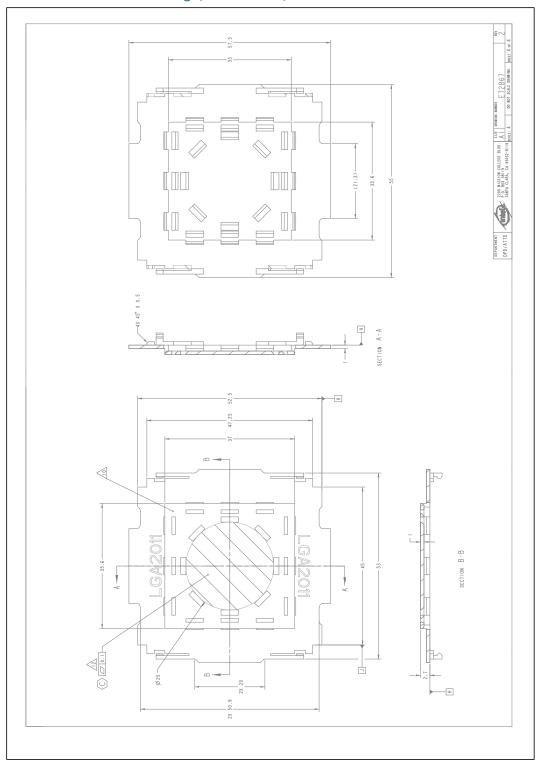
Socket Mechanical Drawing (Sheet 4 of 4)
